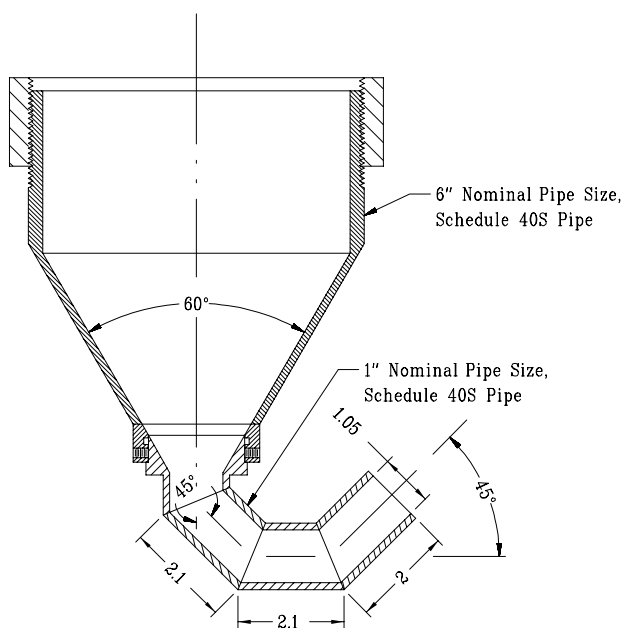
Center Nozzle Showing Nominal Dimensions for 1-inch Nozzle
